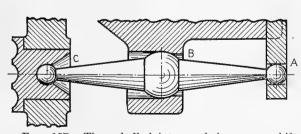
Three ball joints used in a gear-shift mechanism. Hole A is in shifting rod; B is the pivoting center, which is retained by the inserted locating plug at C.
